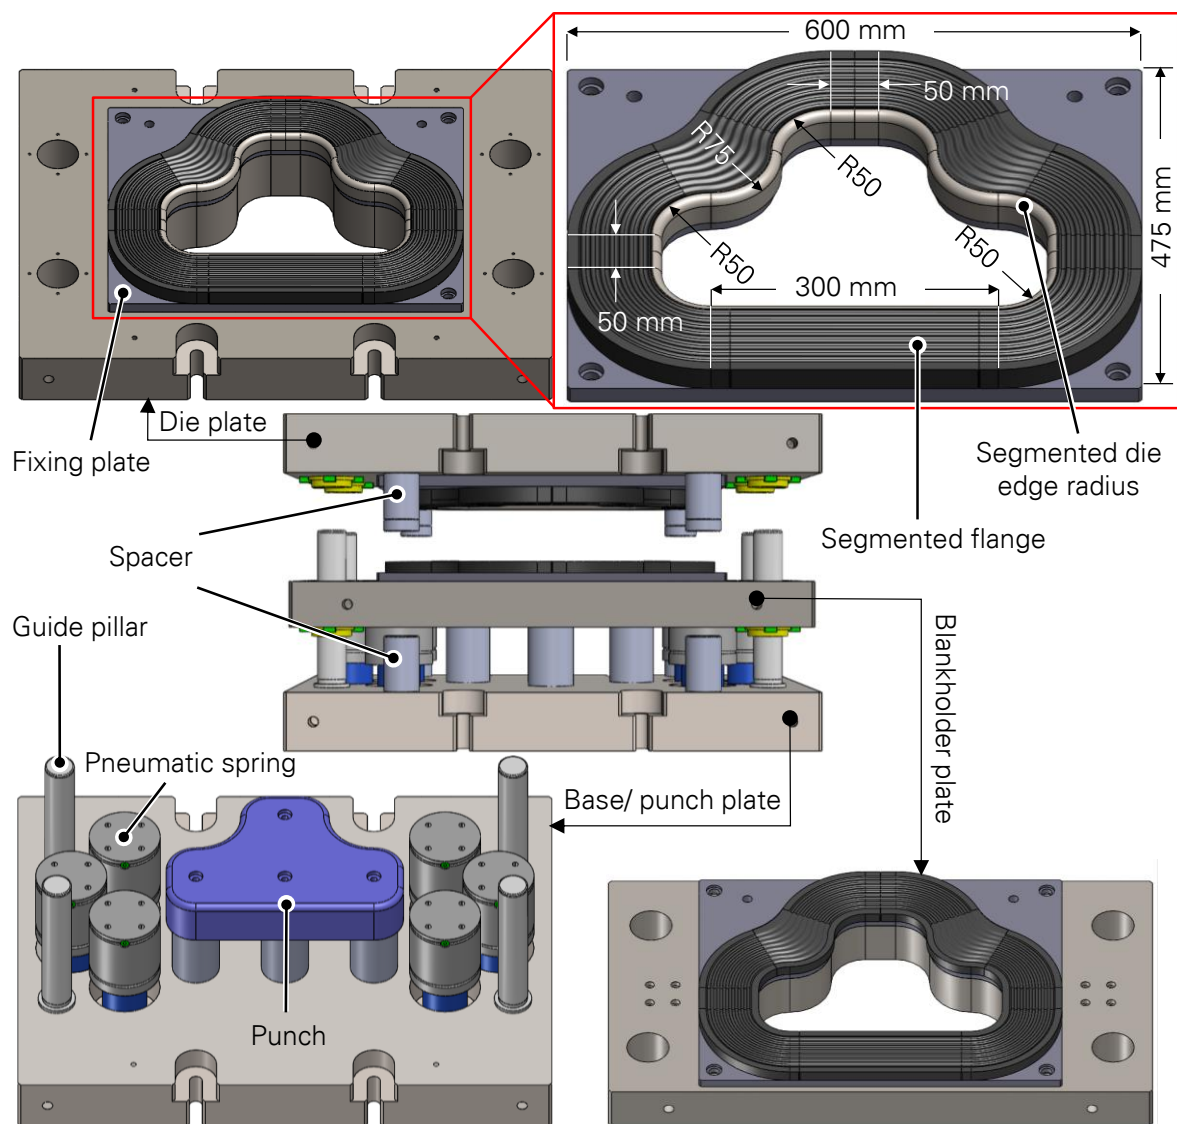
Detailed view and components of the T-Cup deep drawing tool
